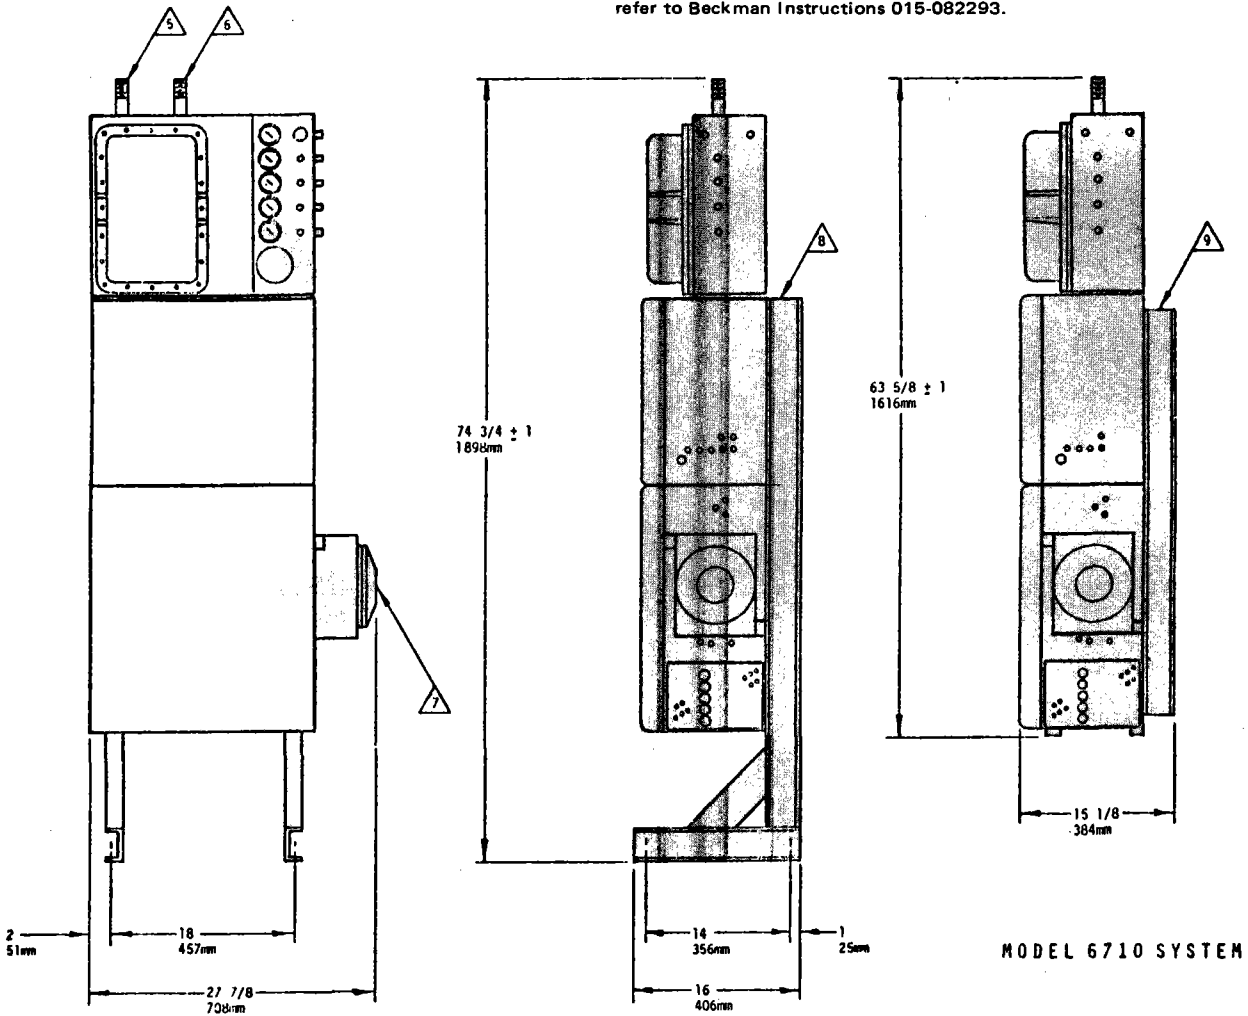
Outline and Mounting Dimensions of Sample-Conditioner/Analyzer Combinations
